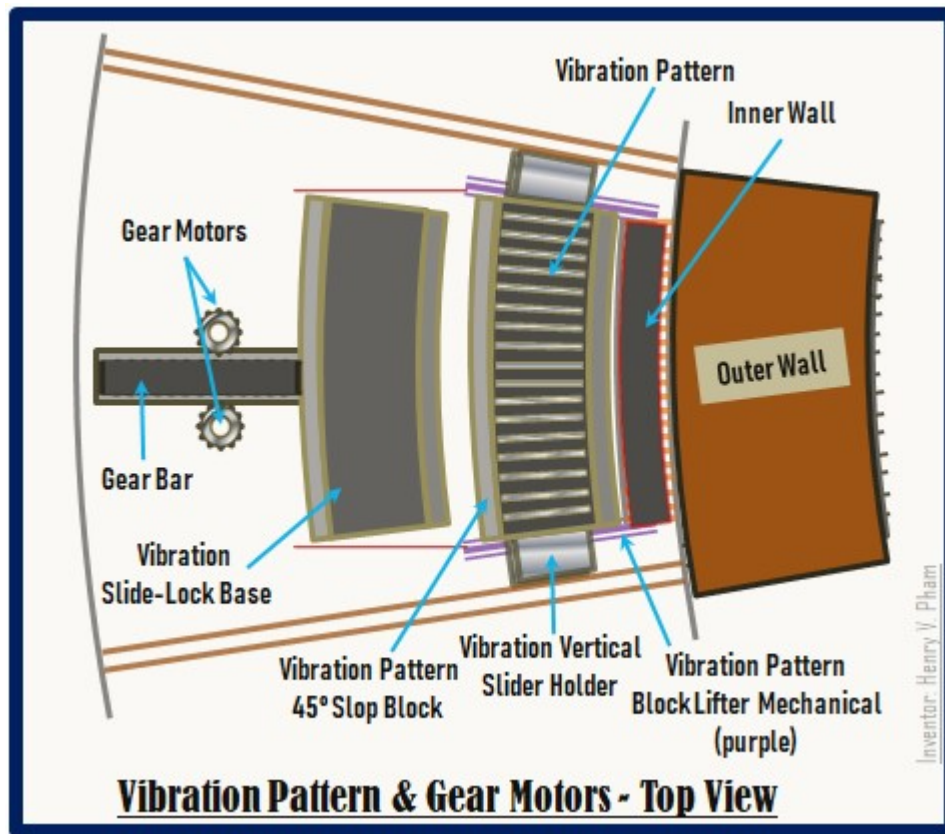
Vibration Pattern Block with Gear Motor Sample
